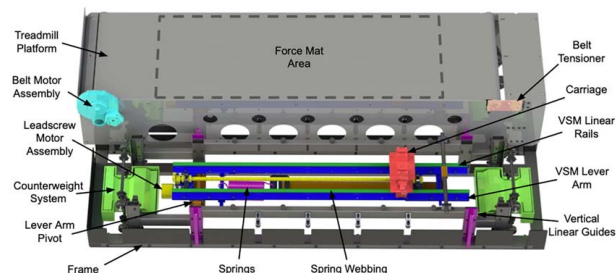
The VST 2 with the right treadmill platform removed to expose inner mechanisms
